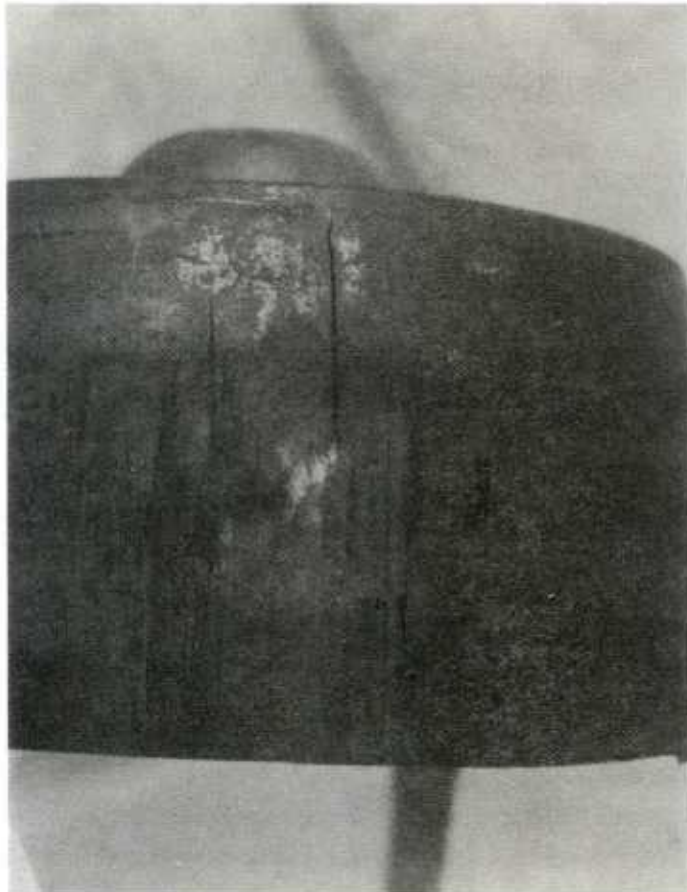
Photograph of longitudinal cracks. (Shell #723)
